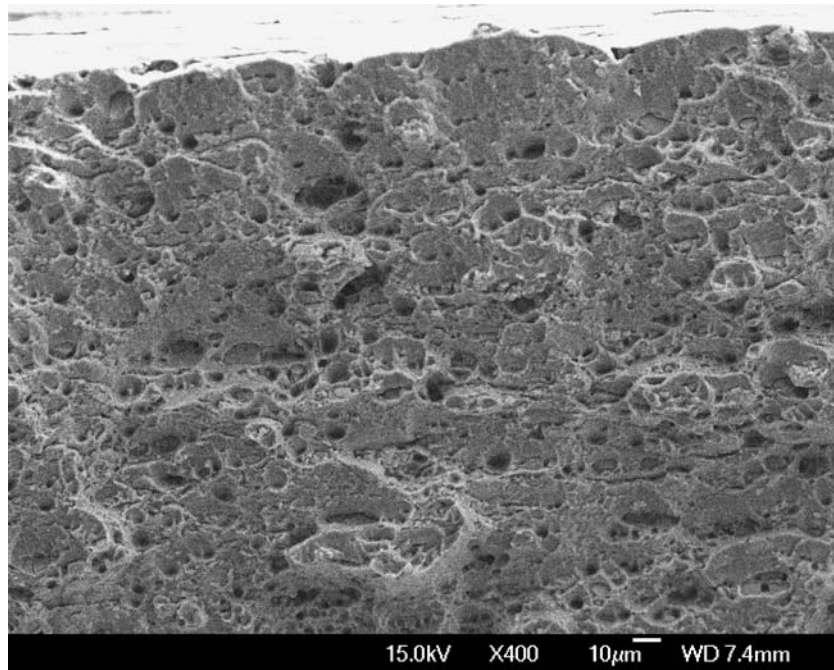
Tensile specimen fracture surface of the studied joint showing voids population.
